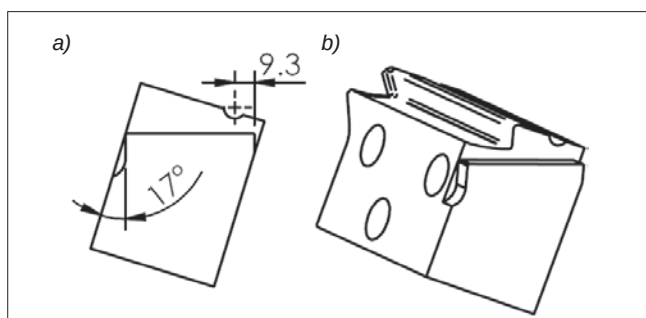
Stamp 2 at various stages of manufacture: a) blank with base surfaces applied, b) final solid in the position used during the first machining
